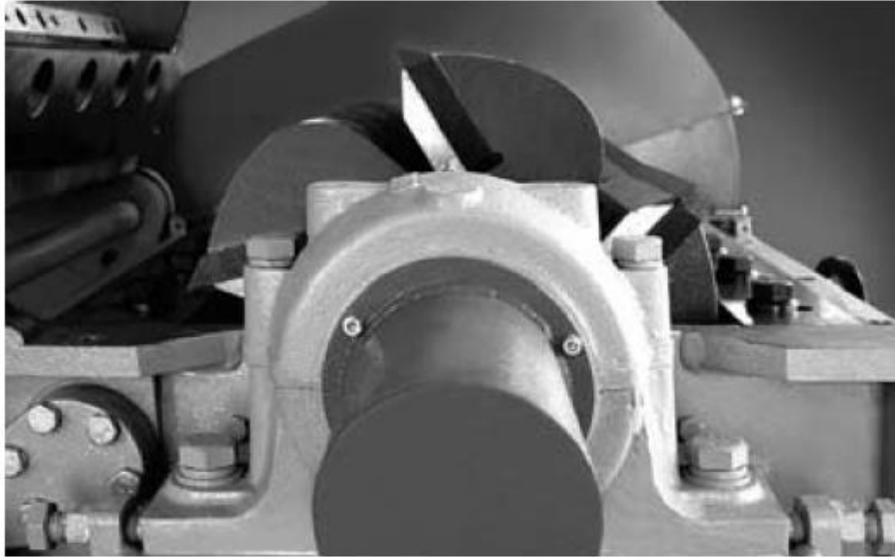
Photograph of a granulator with the blades exposed.
